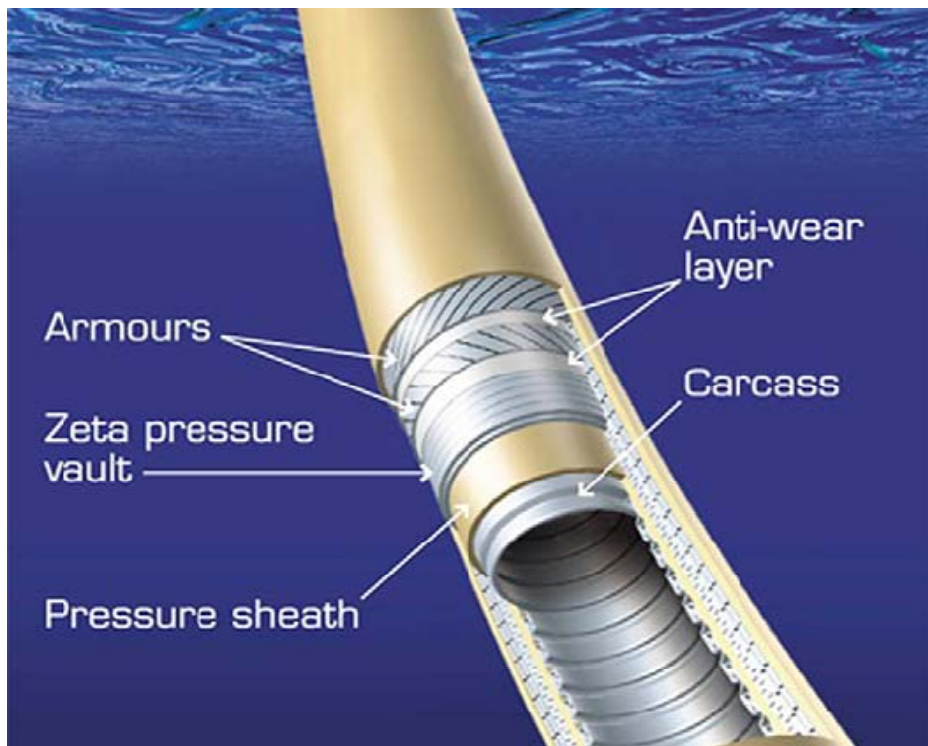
Typical Cross section of flexible pipe. Source: Yong Bai, Qiang Bai Subsea Engineering Handbook
